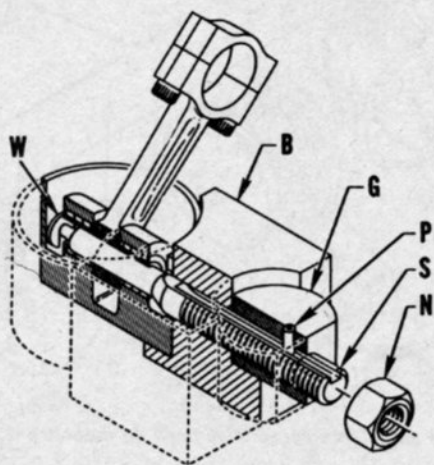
Cross-sectional view showing use of special McCulloch piston pin and needle bearing removal tool. A small washer (W) is inserted between piston skirt and pin boss to pull piston pin. After removing pin, a larger washer is used with tool to remove blind piston pin needle bearing.
